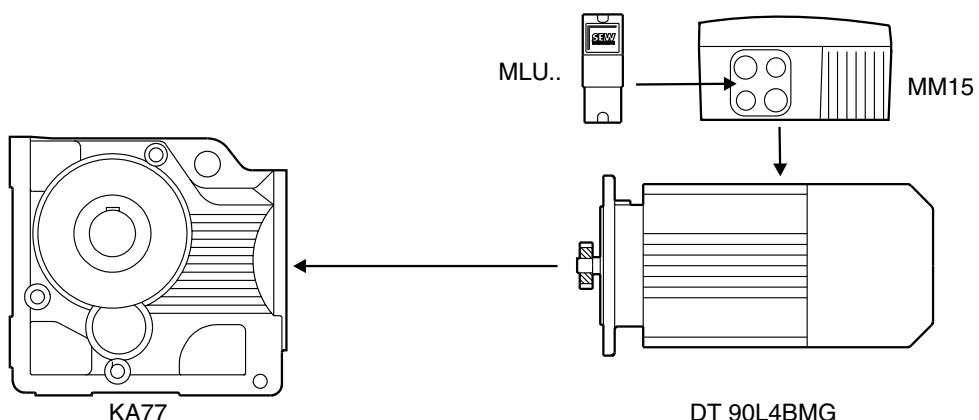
Example for the unit designation of a MOVIMOT® gearmotor
